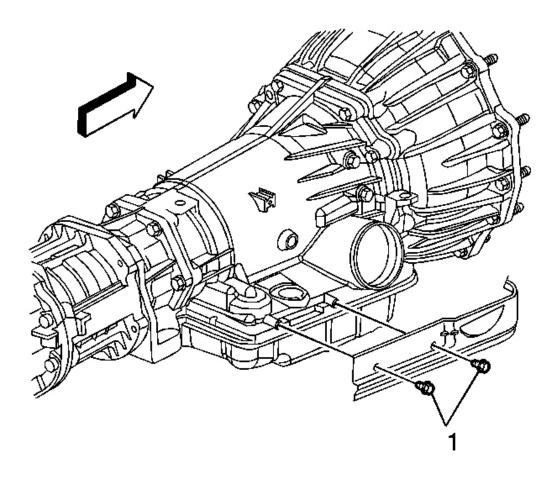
View Of Filler Tube, Nut & Stud Courtesy of GENERAL MOTORS CORP.
